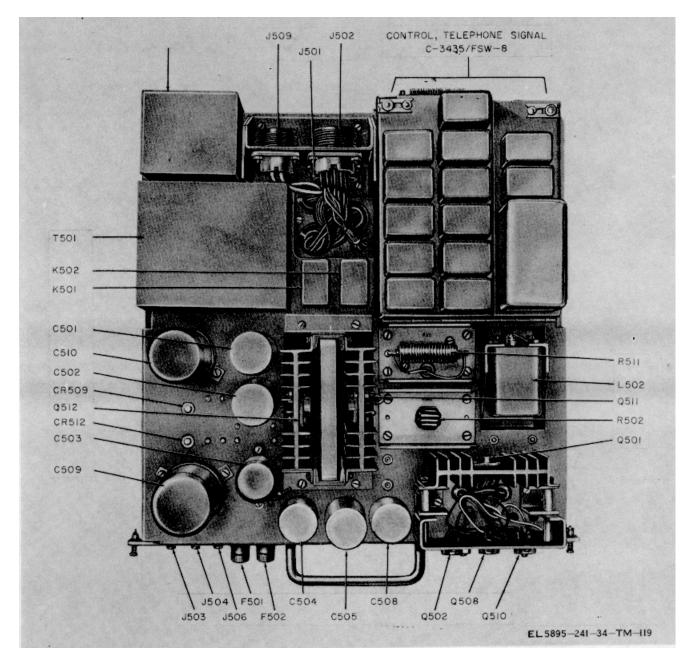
Power Supply PP-2803/FSW-8, top view, parts location.
